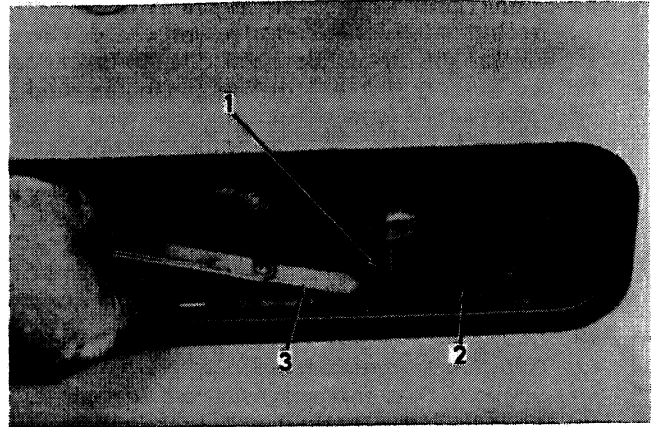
Checking Camshaft Bearing Clearance (T-20215)
